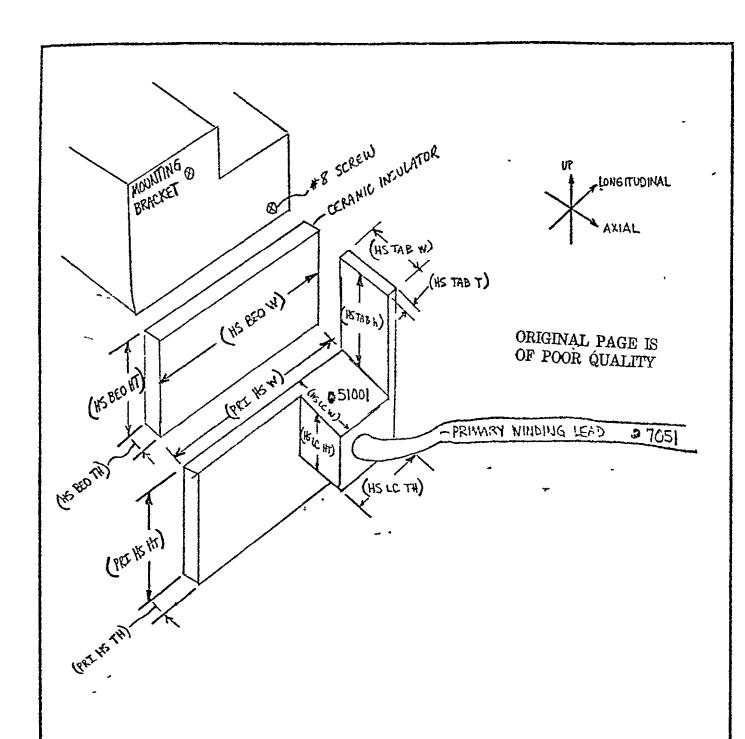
THERMAL MODEL - PRIMARY WINDING : HEAT SINKING
